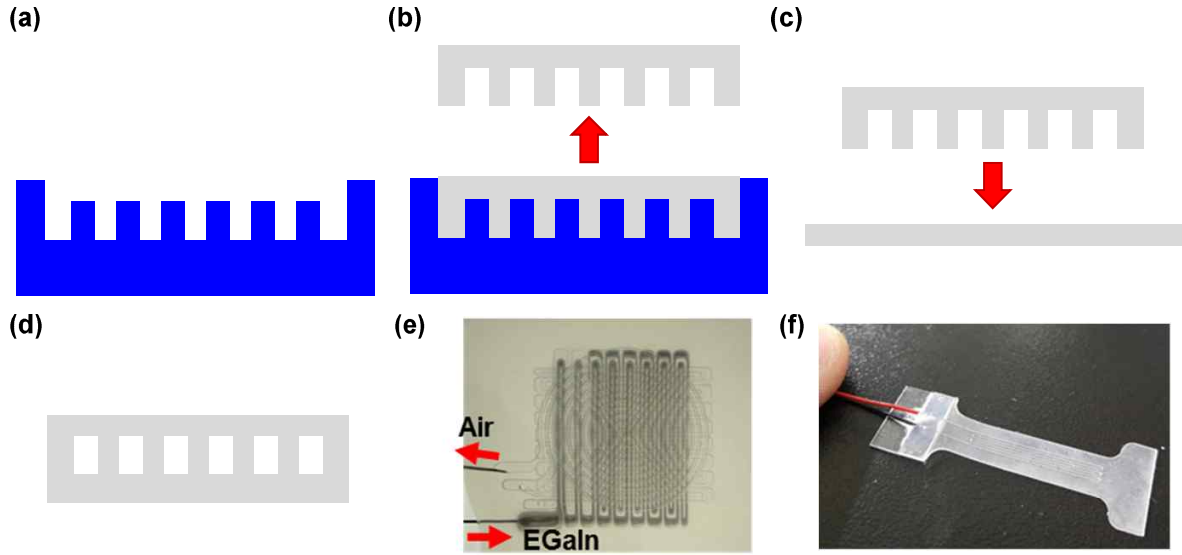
Mold-based fabrication steps: (a) preparation of a mold, (b) casting and de-molding, (c) bonding, (d) trimming, (e) injection of eGaIn, and (f) insertion of wires and sealing.
